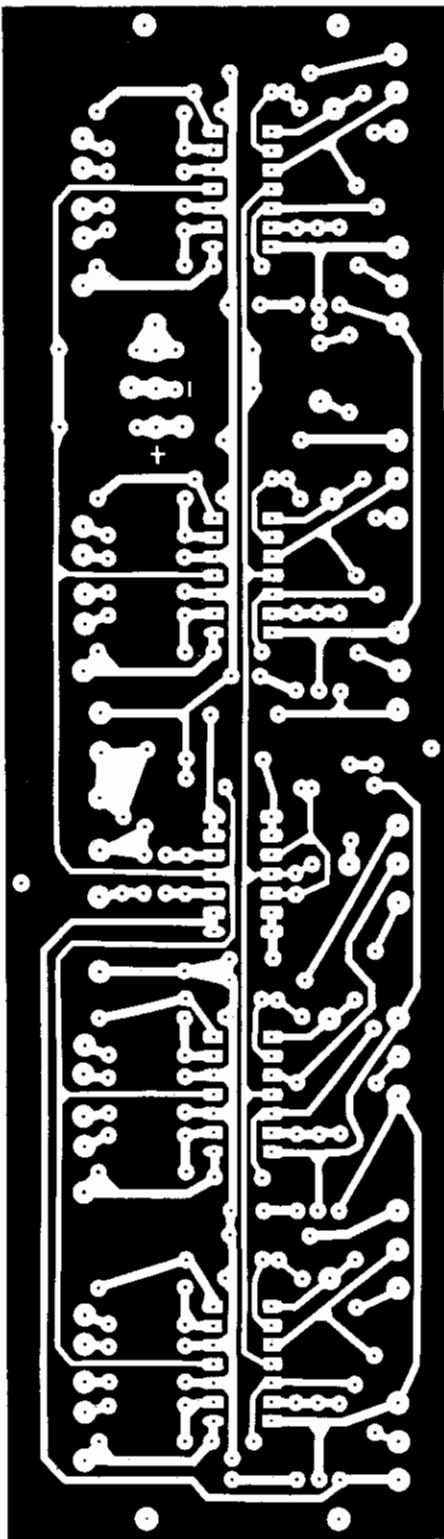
Actual-size etching and drilling guide for the main printed circuit board.
